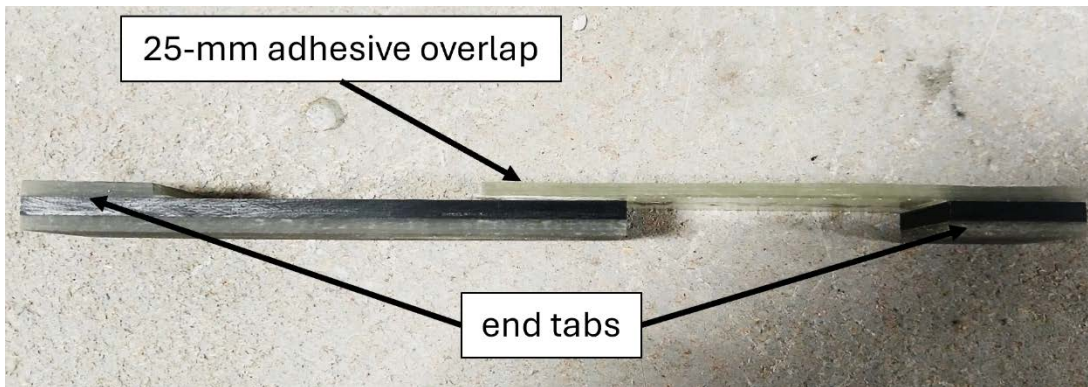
A final 3D-printed polymer/lap shear specimen after CNC milling and cutting to the correct width
